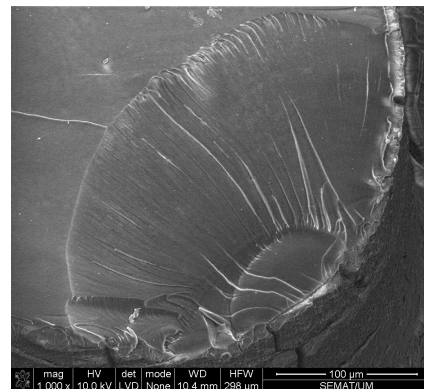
Top view of Pin 2, detailing primary fracture surface
